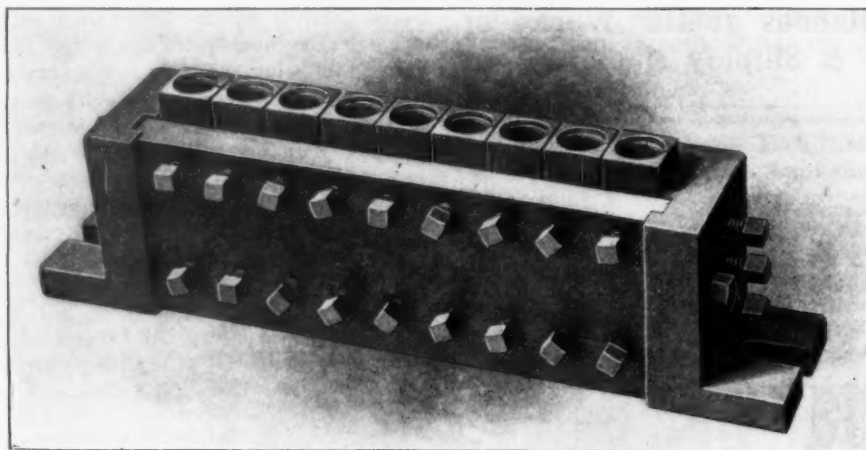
Jig for Holding Lathe Tool Post Screws for Milling.
